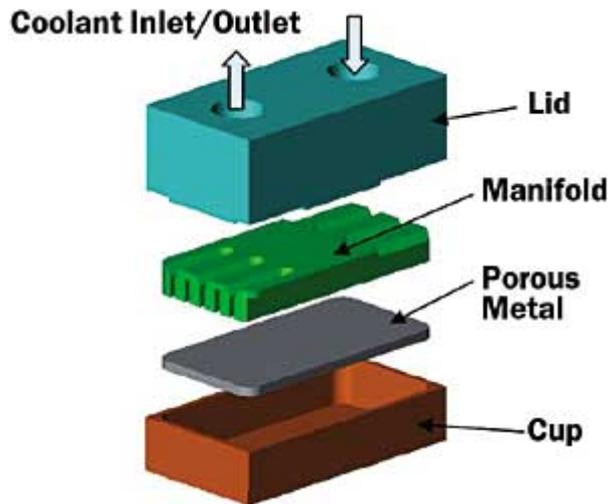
Powdered metal cold plate (PCMP) assembly
